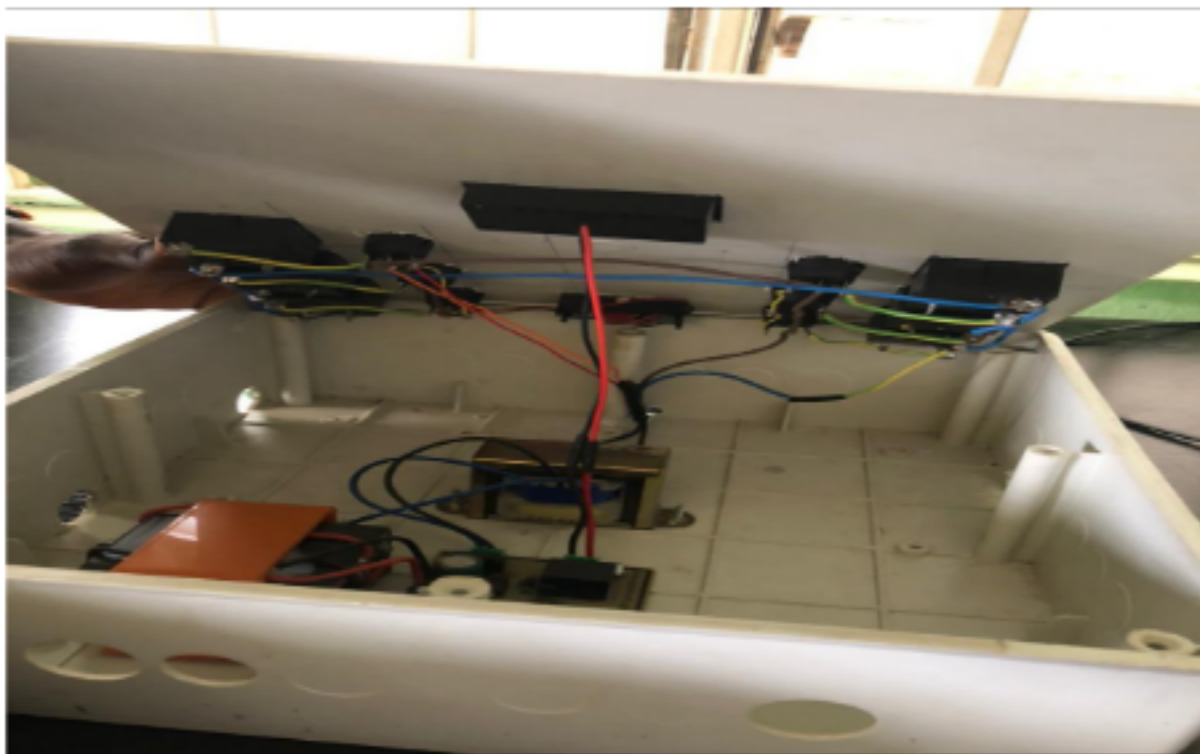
Closing of the arranged soldered component of the project in the casing
